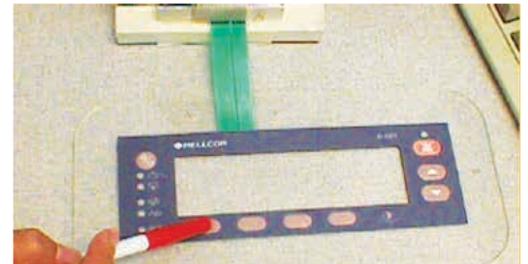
Detail view: tactile membrane switch is laying flat in proper test fixture during test key actuation.
